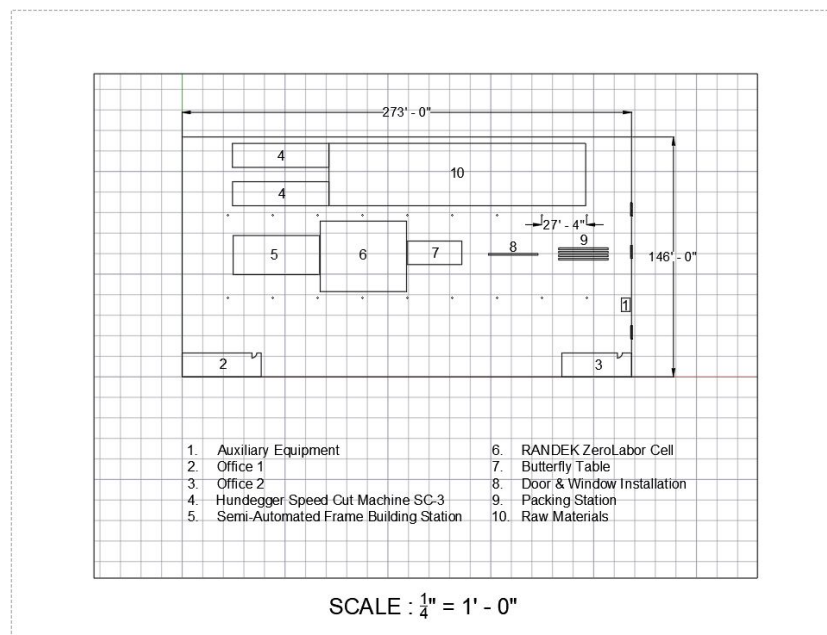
Suggested Monson Facility System Layout II (Not to Scale)
